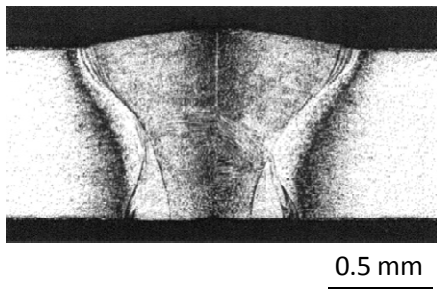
Typical cross-section of laser weld in this study.
